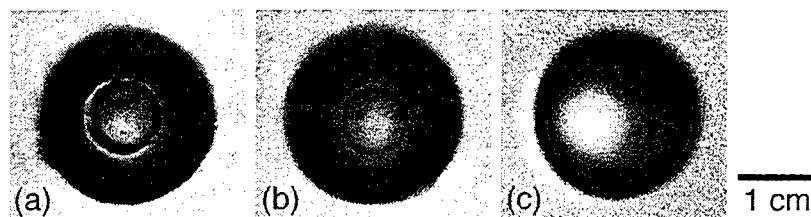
Metal Forming Results on 0.033" Sheet using (a) Unlubricated Dies from SLA Molds, (b) Dies from SLA Molds with Teflon Interpolator, and (c) SS316 Dies from NC Machined Molds
